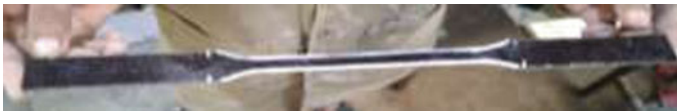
Dumb-bell shaped tensile test specimen with 50 mm gauge length
